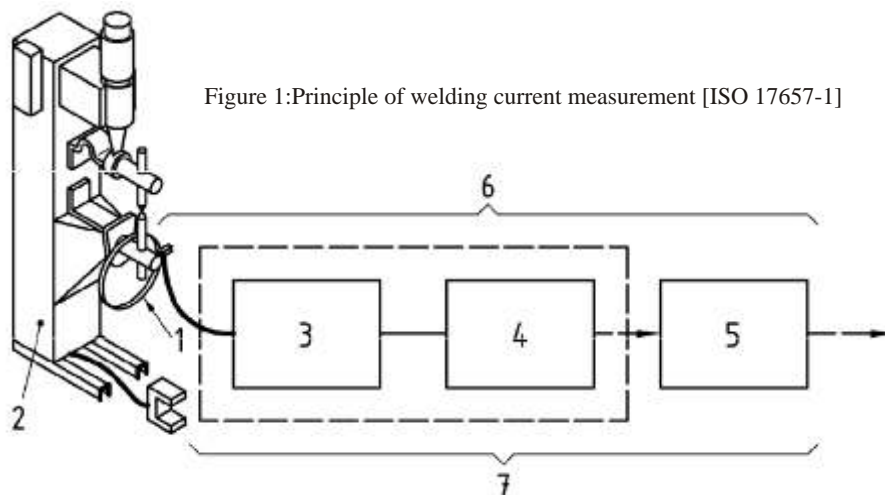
Principle of welding current measurement [ISO 17657-1]
